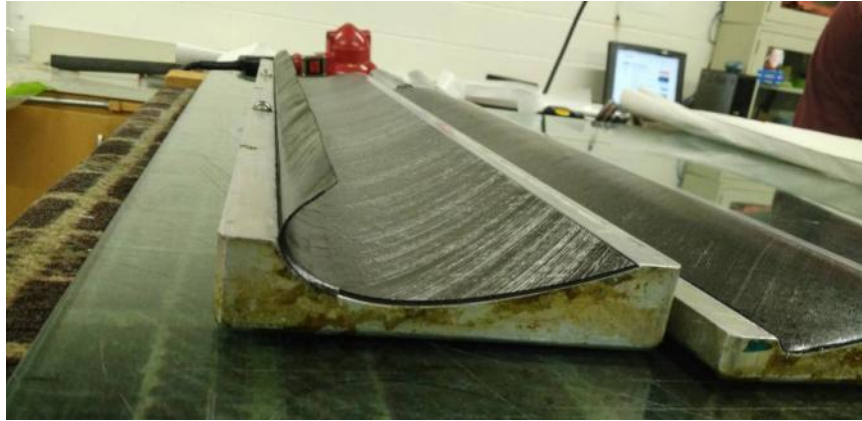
Leading edge strip used to attach the upper and lower surfaces
